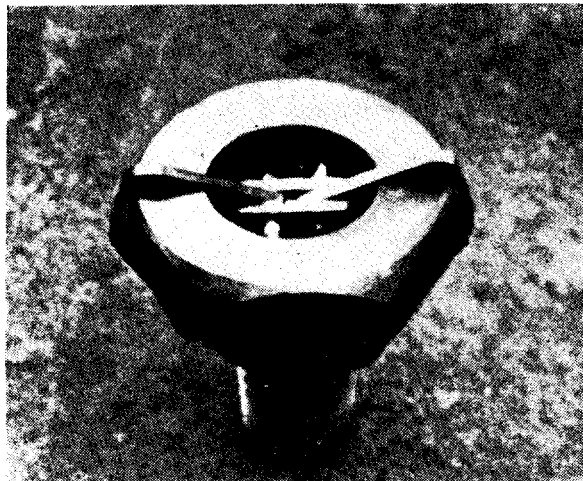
OIL RETAINING VALVE AND SEAT ASSEMBLY
